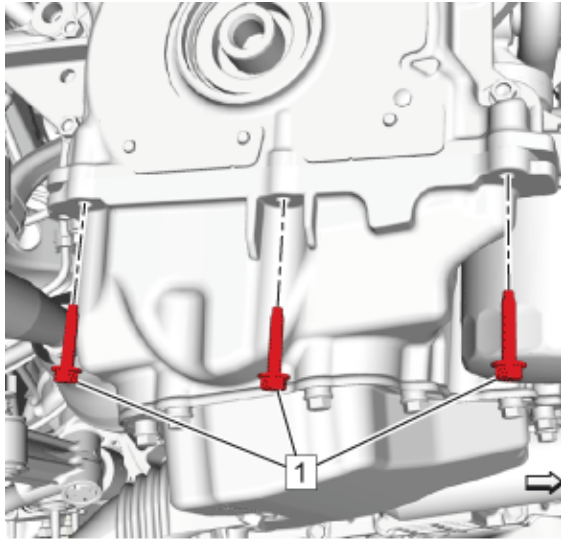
Oil Pan Bolts And Upper Oil Pan
